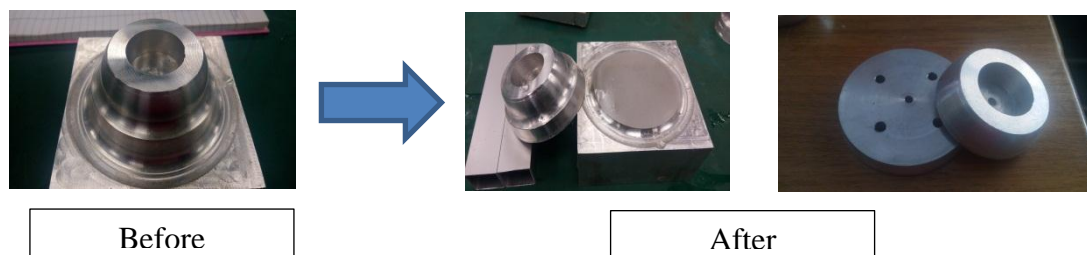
Aluminum mold before and after cutting by using EDM Wire Cut
